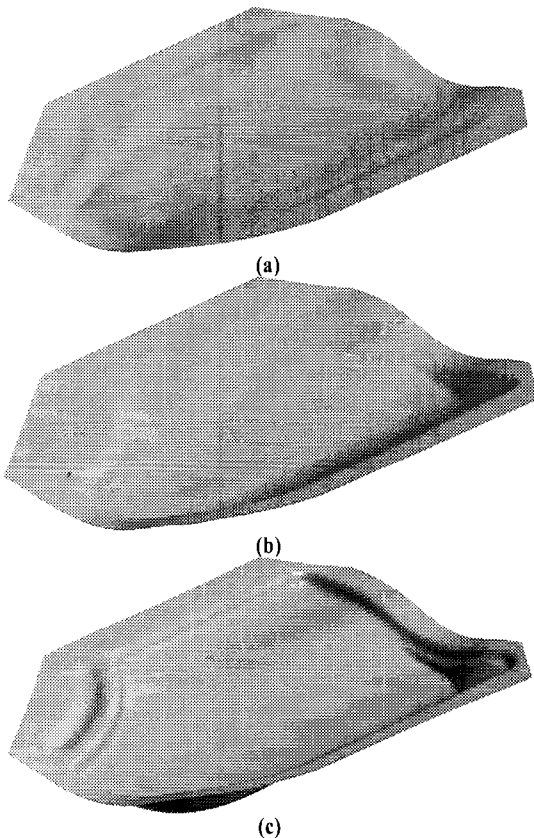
Deformed shape of blank: (a) binder wrap state; (b) half punch stroke; (c) final punch stroke
